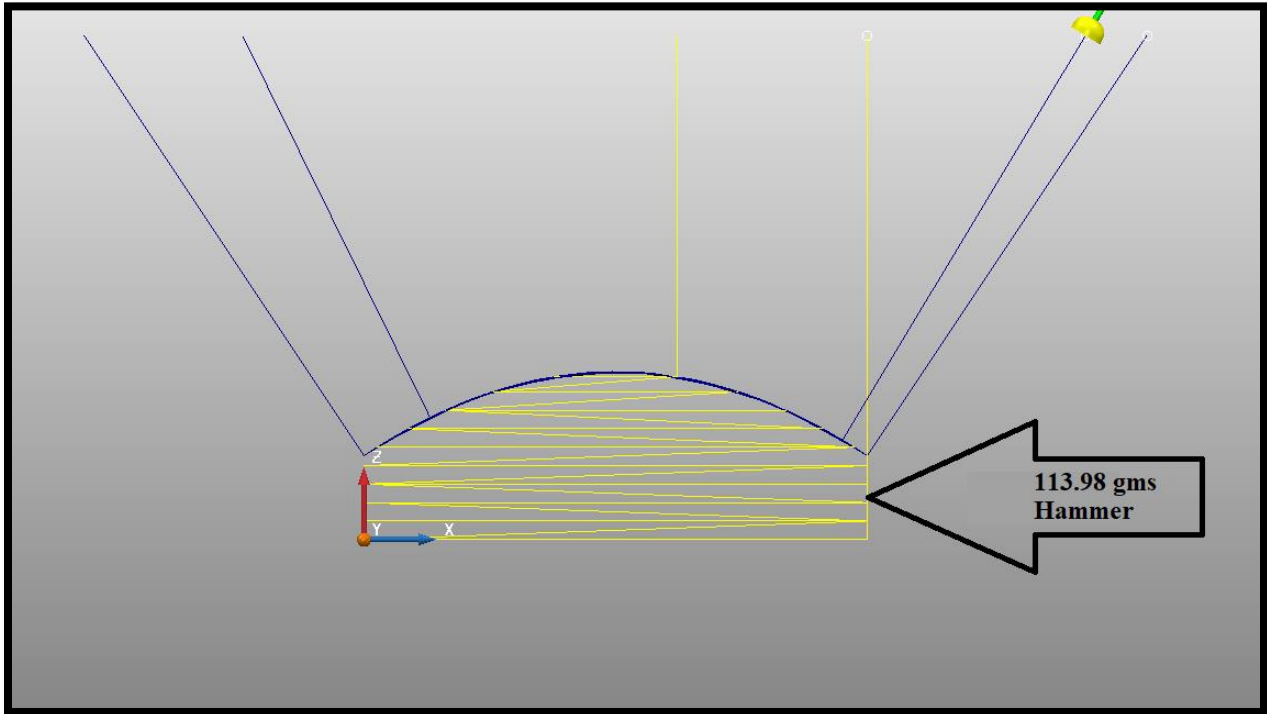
Side View of Hammer Impact Location On Charpy Specimen
